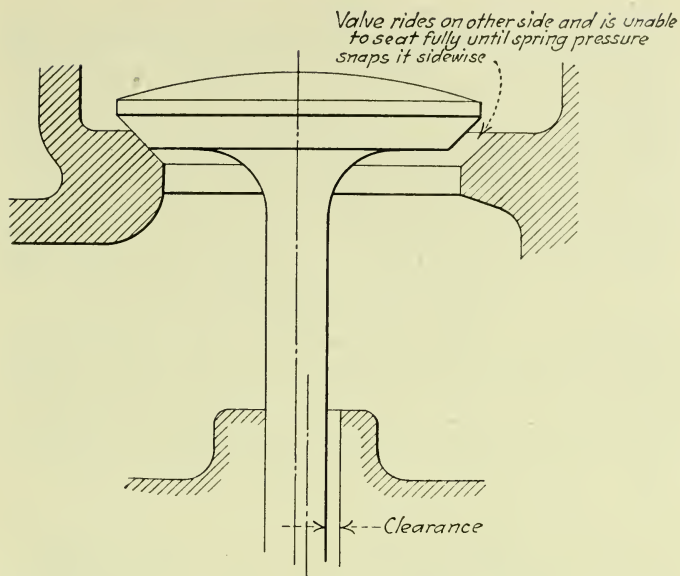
SKETCH, SOMEWHAT EXAGGERATED, TO SHOW THE IMPROPER CENTERING OF THE VALVES IN THE CONICAL SURFACE IN THE CYLINDER
